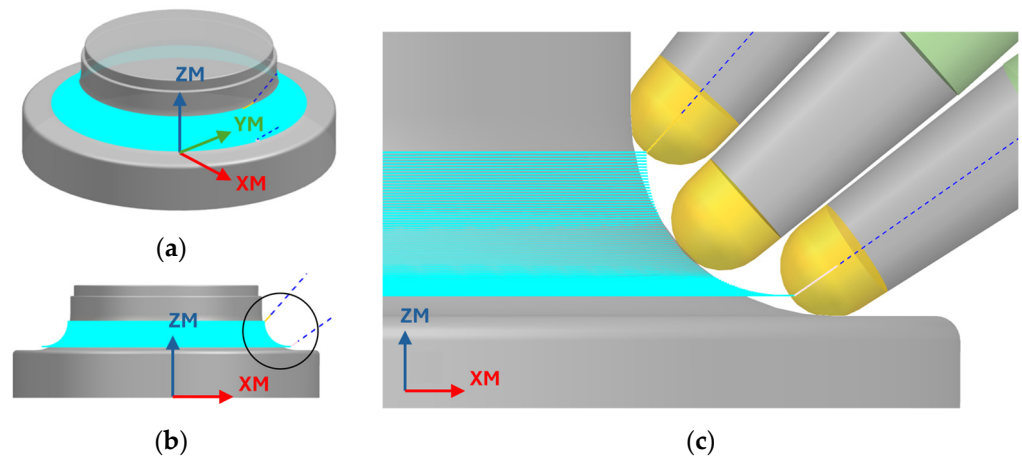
(a,b) 3D geometry of the test piece and machining path (c) Zoom of the area shown in b: blank, path and tool in 3 positions.
